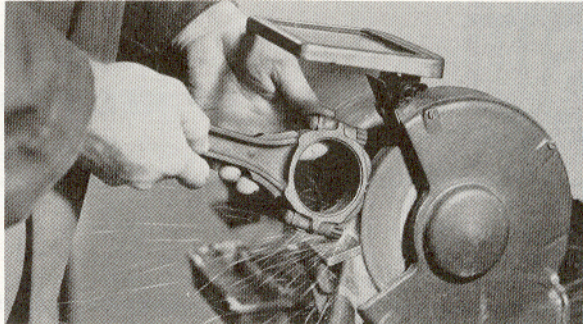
Removing Weight from Crank End of Connecting Rod
